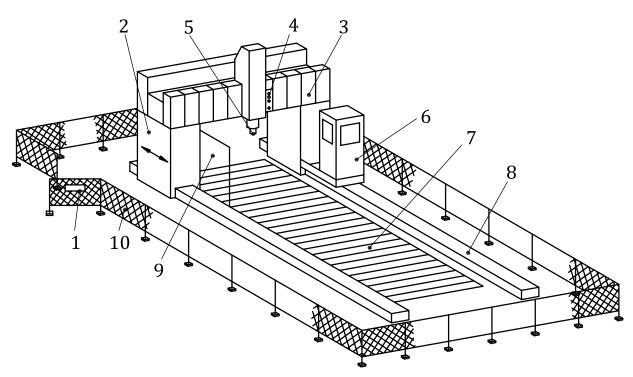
Example of a large automatic bed-type milling machine with full safe guarding of the work zone
